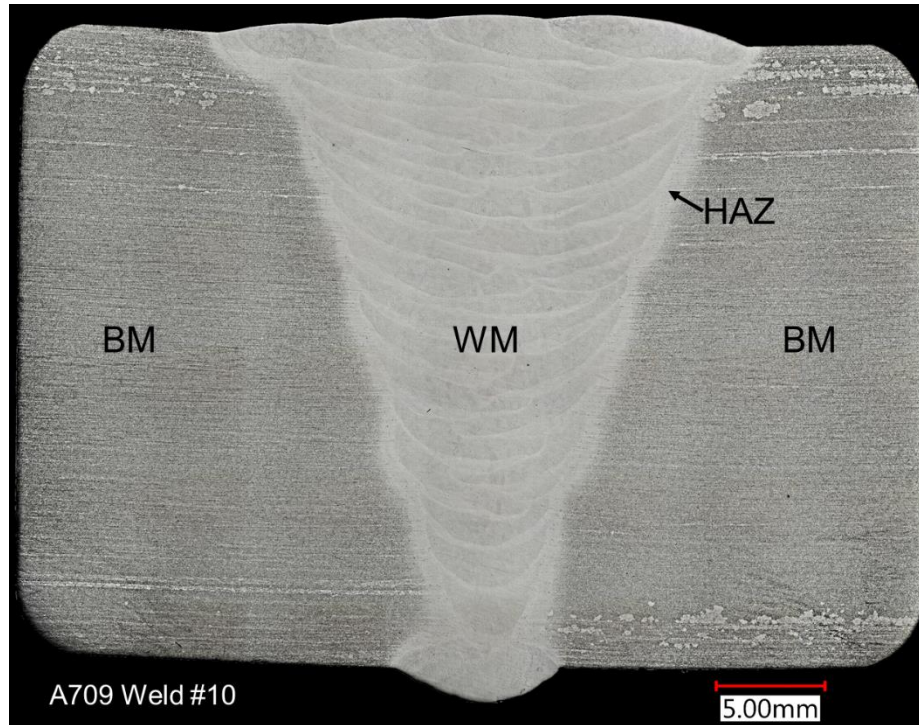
Optical image showing cross-section of the weld W10.
